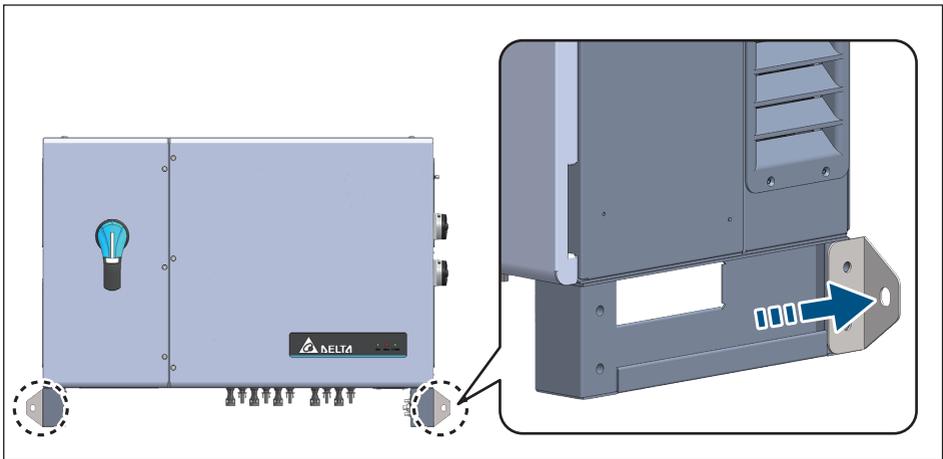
To secure inverter reinforce brackets to wall-mounting bracket
